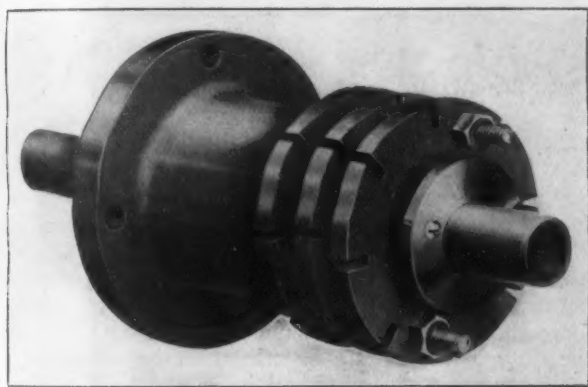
The Adjustable Shaft Bearing, Manufactured by the Sauer Power Generating Company, Pittsburgh, Pa.
